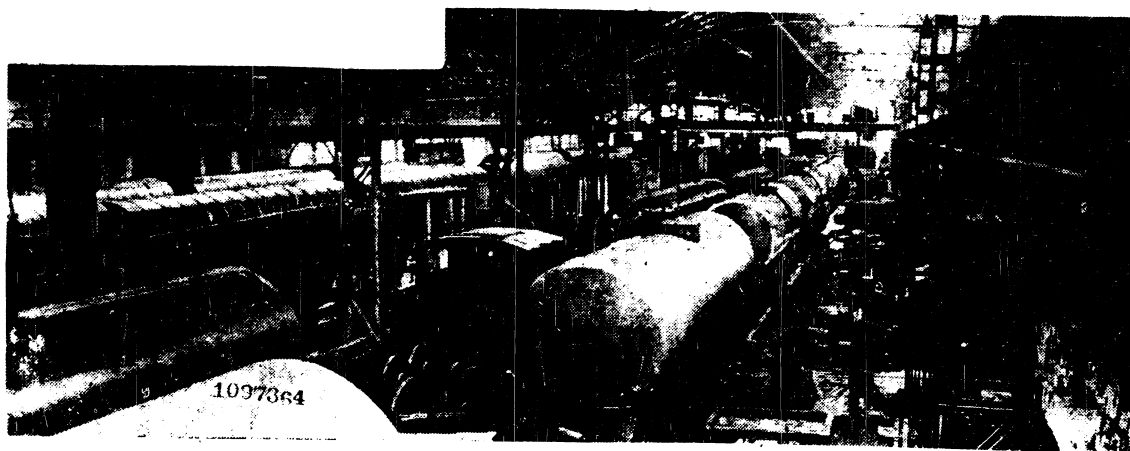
A New Section of 50-ton Tank Cars Will Leave the "23 August" Plant
